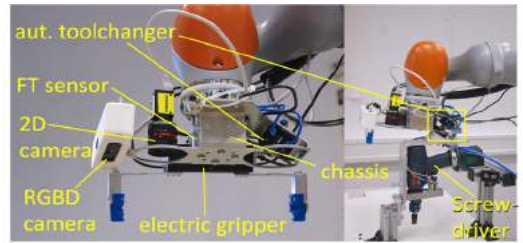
Flexible tool prototype (2nd gripper not installed)
